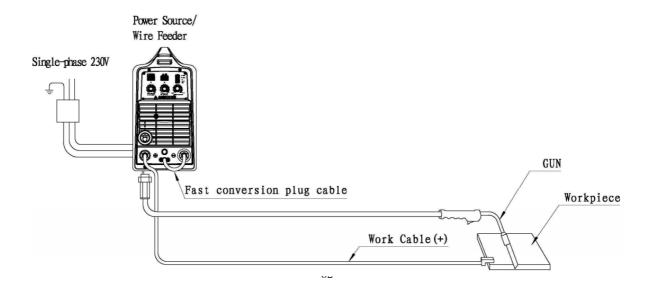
Installation – FCAW-S welding with push gun
